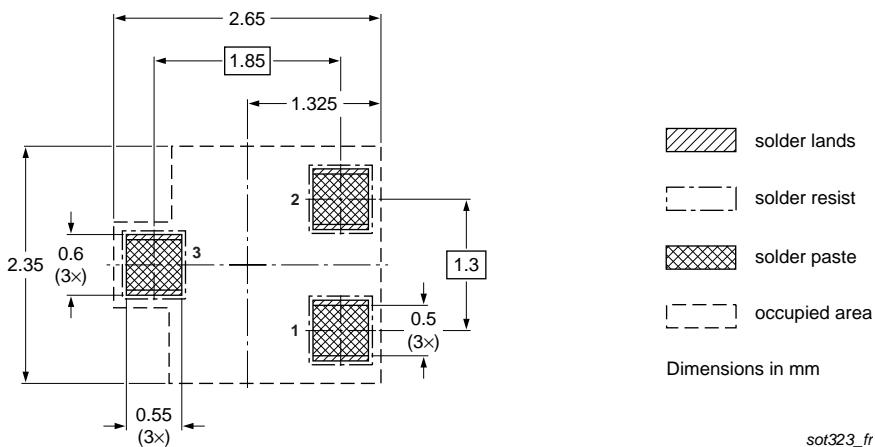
Reflow soldering footprint for SOT323 (SC-70)
